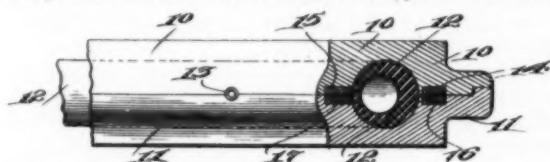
Mold for curing Single Tube Tires. Description: 10, 11, upper and lower halves of mold; 12, rubber tire; 13, valve stem; 14, 15, coils for magnetizing and heating upper half of mold; 16, 17, coils for magnetizing and heating lower half of molds.
